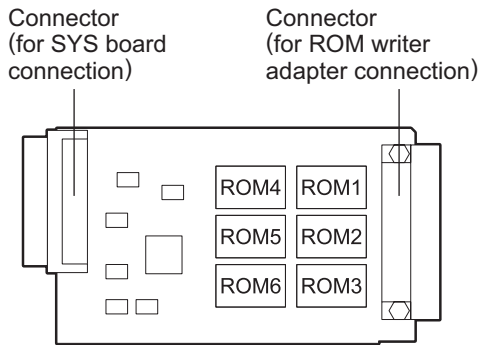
Jig board: PWA-DWNLD-350-JIG2(48 MB)
